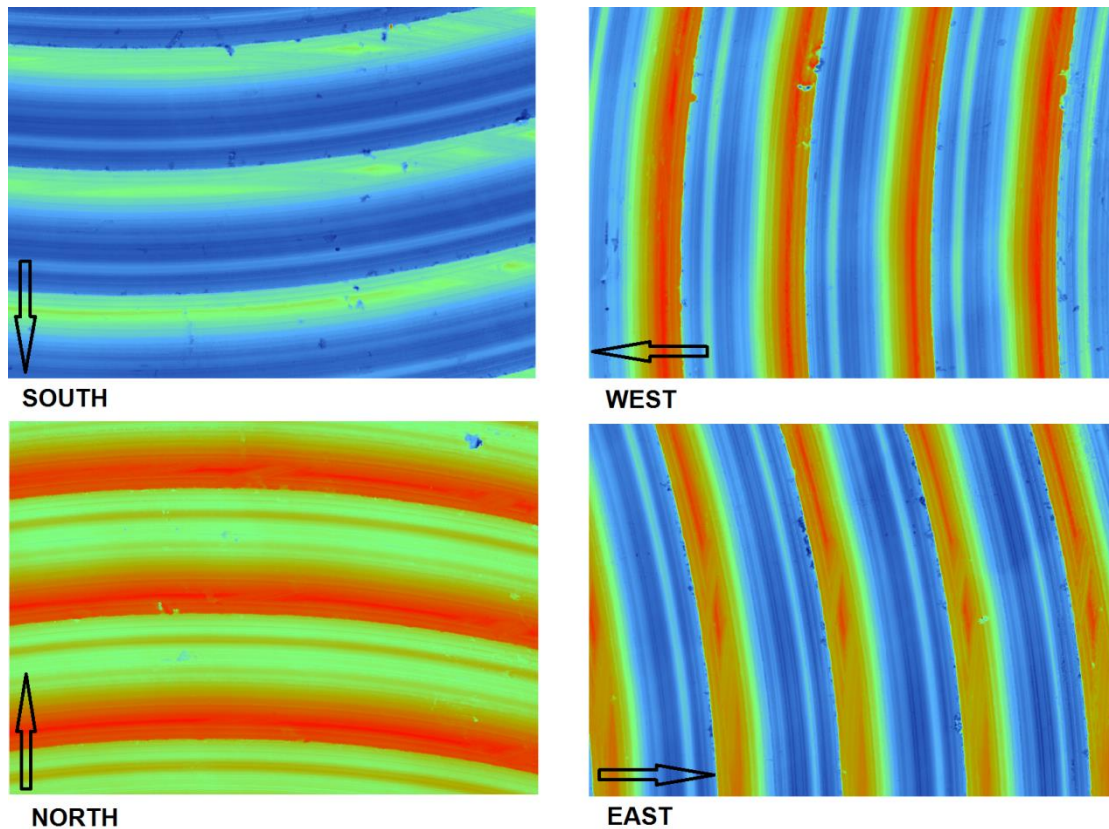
Sample #31, Feed = 0,4 mm/tooth, material 1.2312 – Machined with GENTIGER milling machine
